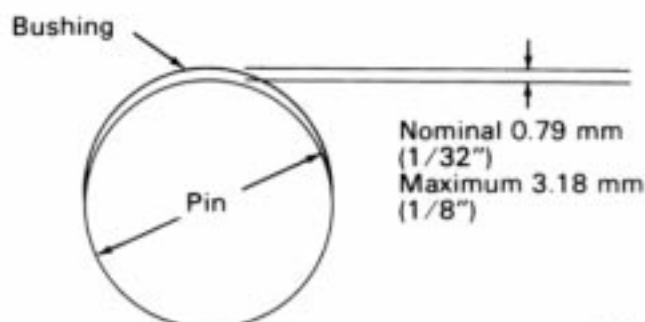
Swing Hanger Pin And Bushing Wear Limit
